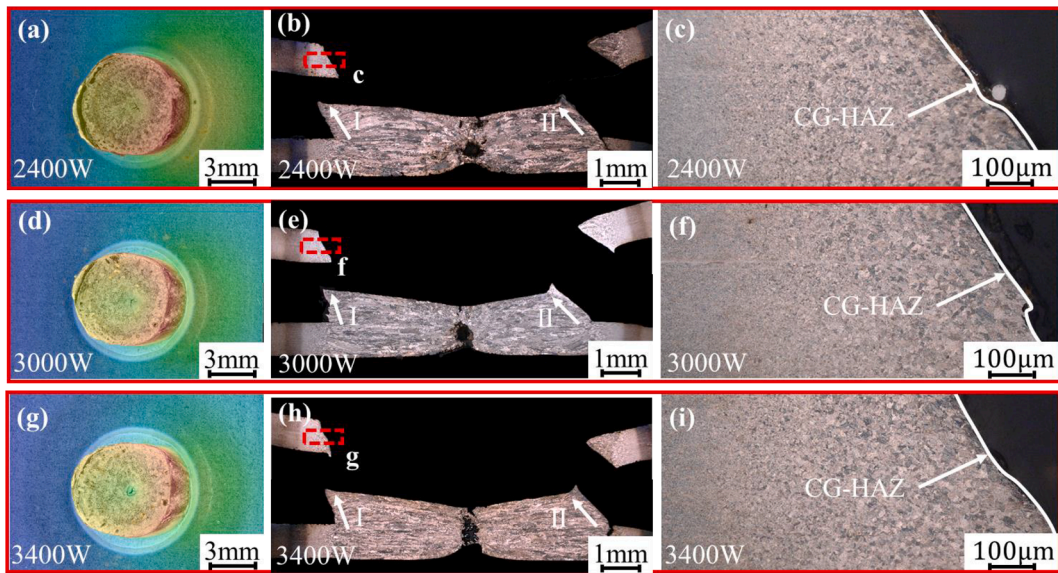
Typical partial thickness-partial pullout failure fracture mode of remote laser spot weld in Q&P980 steel: (a), (d) and (g) fracture surface of 2400 W, 3000 W and 3400 W; (b), (e) and (h) fracture cross-section of 2400 W, 3000 W and 3400 W; (c), (f) and (i) fracture location of 2400 W, 3000 W and 3400 W.
